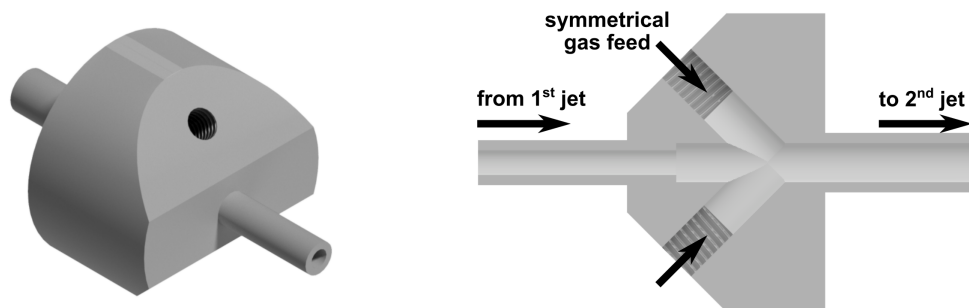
CAD sketch of the full connector on the left and a half section view on the right indicating the gas flows.
